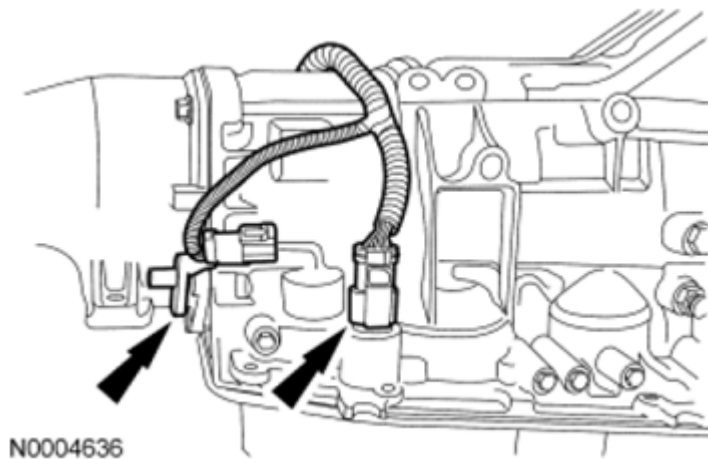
Locating Heated Oxygen Sensor And Solenoid Body Sensor Electrical Connectors
